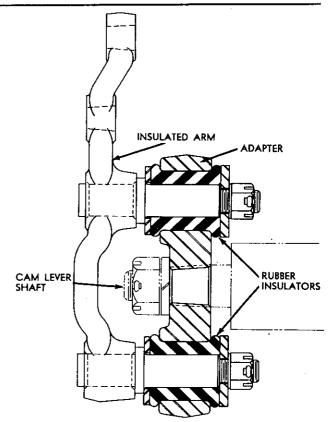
CONSTRUCTION OF THE CHAMPION STEERING GEAR ARM
